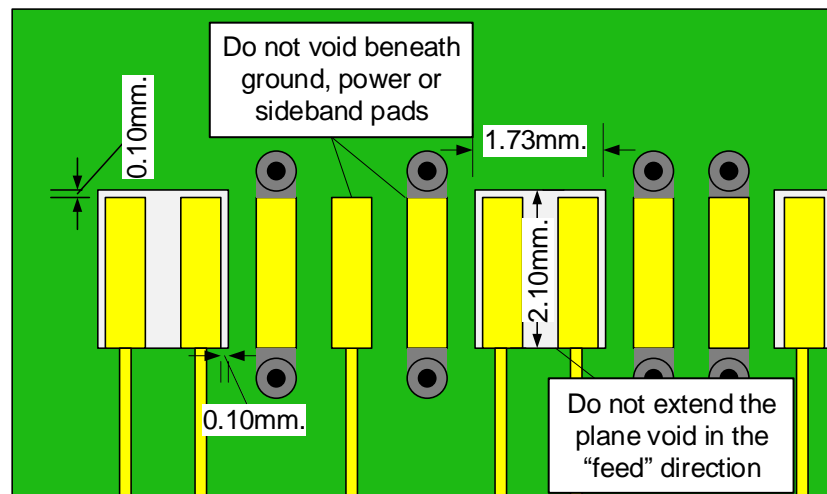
System Board PCI Express Connector SMT Footprint, Highlighting the Suggested Voiding Scheme for High-speed Pairs
